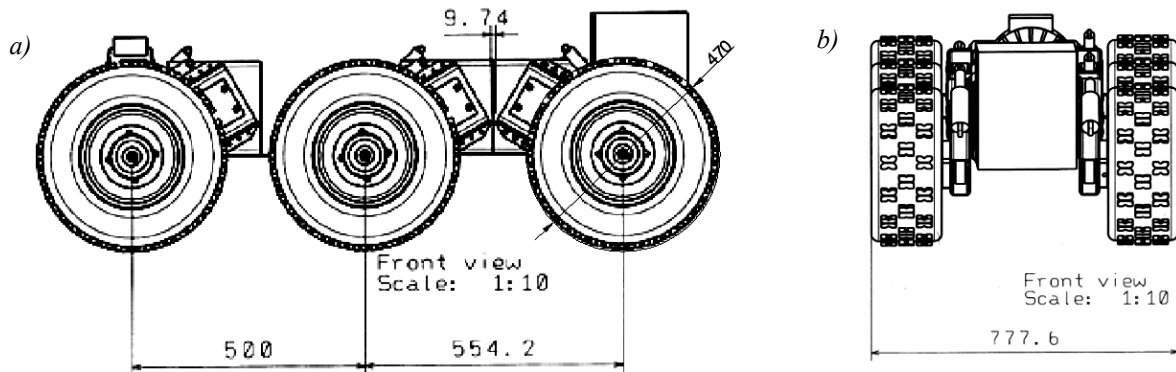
Dimensions of unmanned platform a) side view, b) front view [9]
